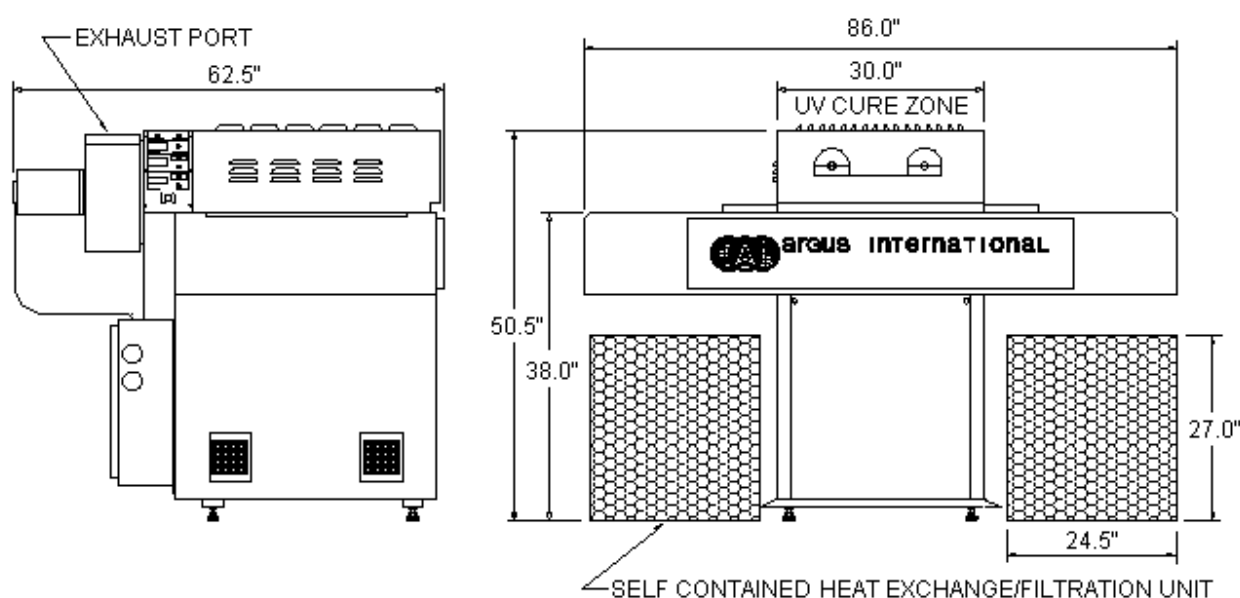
Double Sided UV Curing System Machine Dimensions
